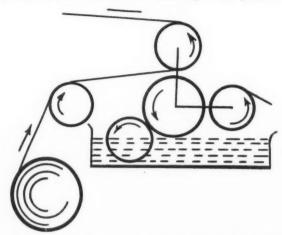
Reverse roller type coater has a roller about half submerged in a tank which is filled with lacquer.
